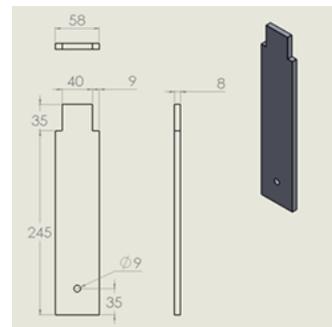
Geometry of GFRP plates used in the test (dimensions in mm)
